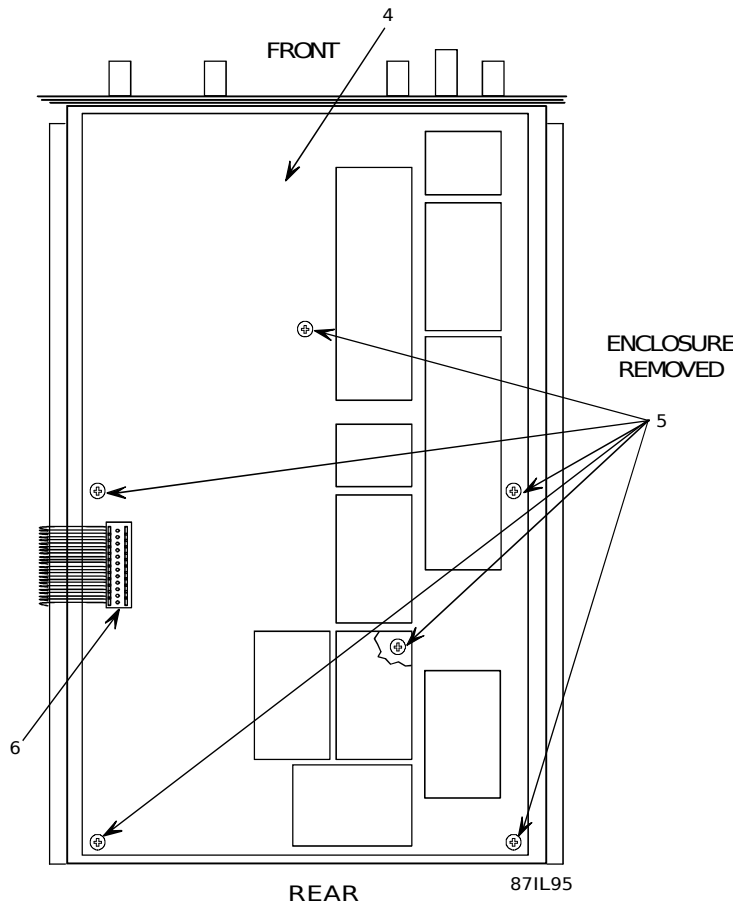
RF Tuner Assembly (A3) Remove and Replace Procedures (Part 2)
